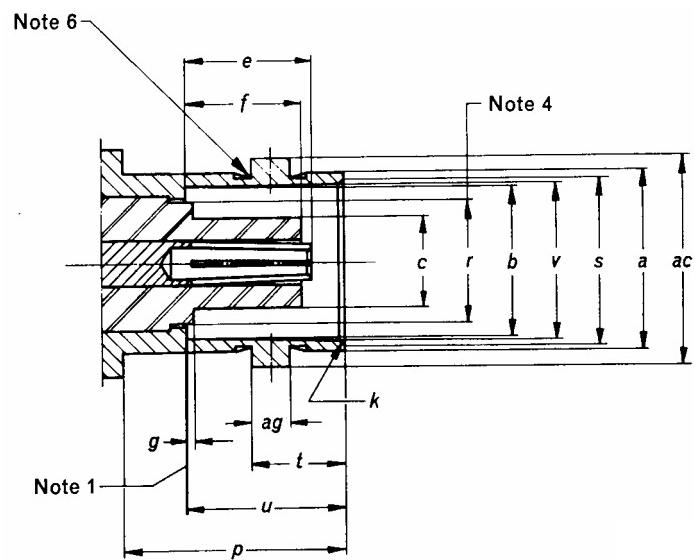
Connector with socket-centre contact (for dimensions, see Table 2)
